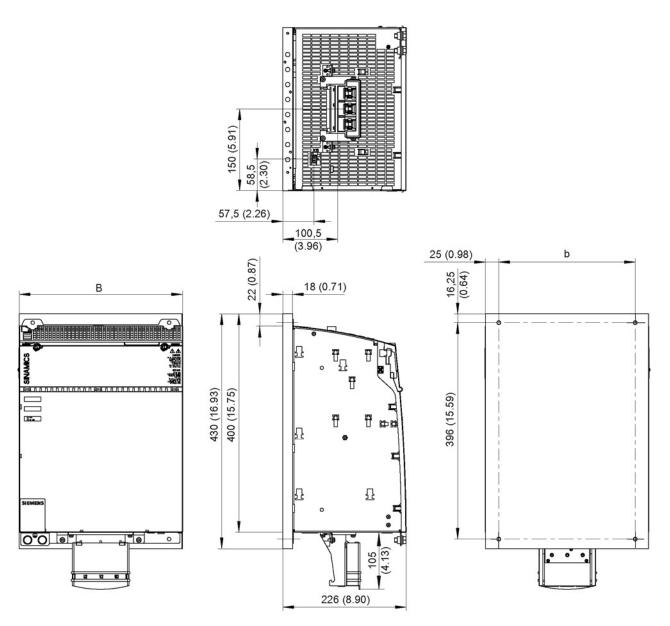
Dimension drawing of Motor Modules Booksize 132 A and 200 A with cold plate, all dimensions in mm and (inches); example for Motor Module 200 A
